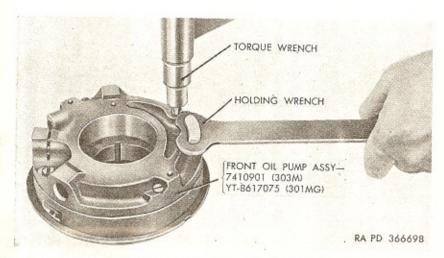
Use of holding wrench-B7950328 at front oil pump.
